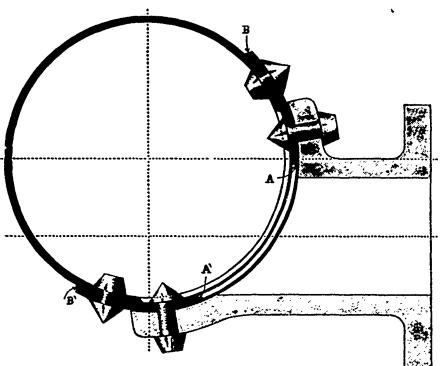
is a section through a nozzle such as would be put on a large drum, either of lay-welded pipe, or a rivetted-up drum. It should be put on eccentrically when connections to the boilers are made. For pipes leading out of the drum this is not essential, and the connection had better be
